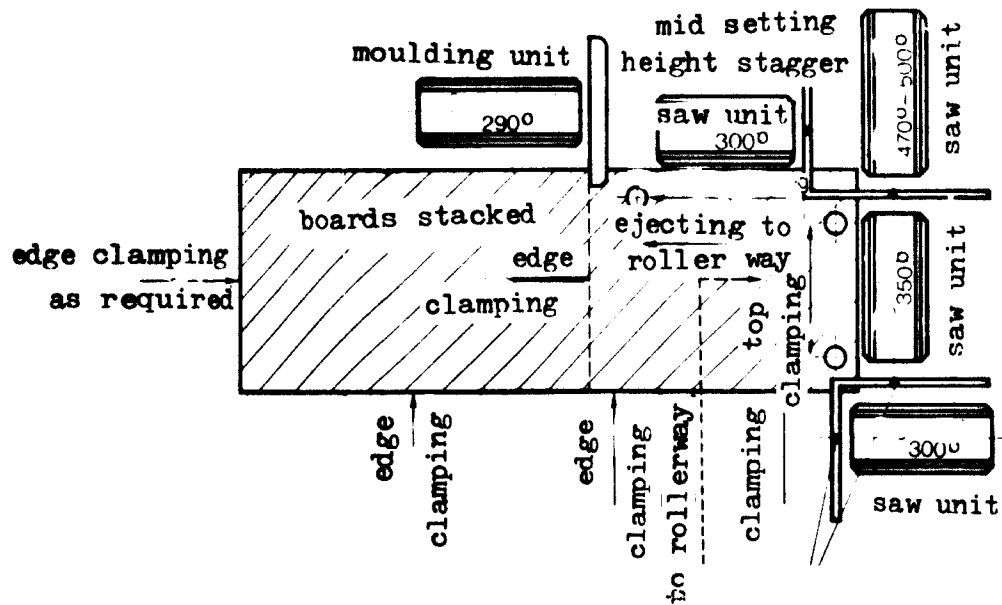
The units run at 3000 RPM. Sawing and moulding tools are mounted directly on the motor shafts. Drive and clamping functions all pneumatic.
